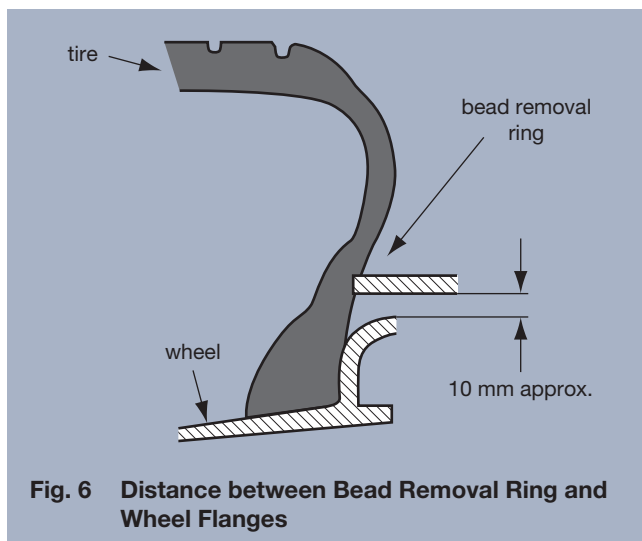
Distance between Bead Removal Ring and Wheel Flanges
